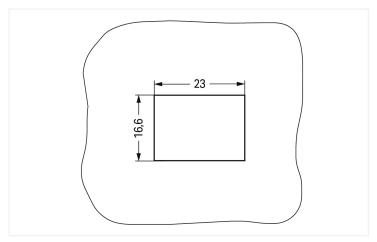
Plate thickness: 1 ... 3 mm Cutout tolerance: + 0.1 mm
